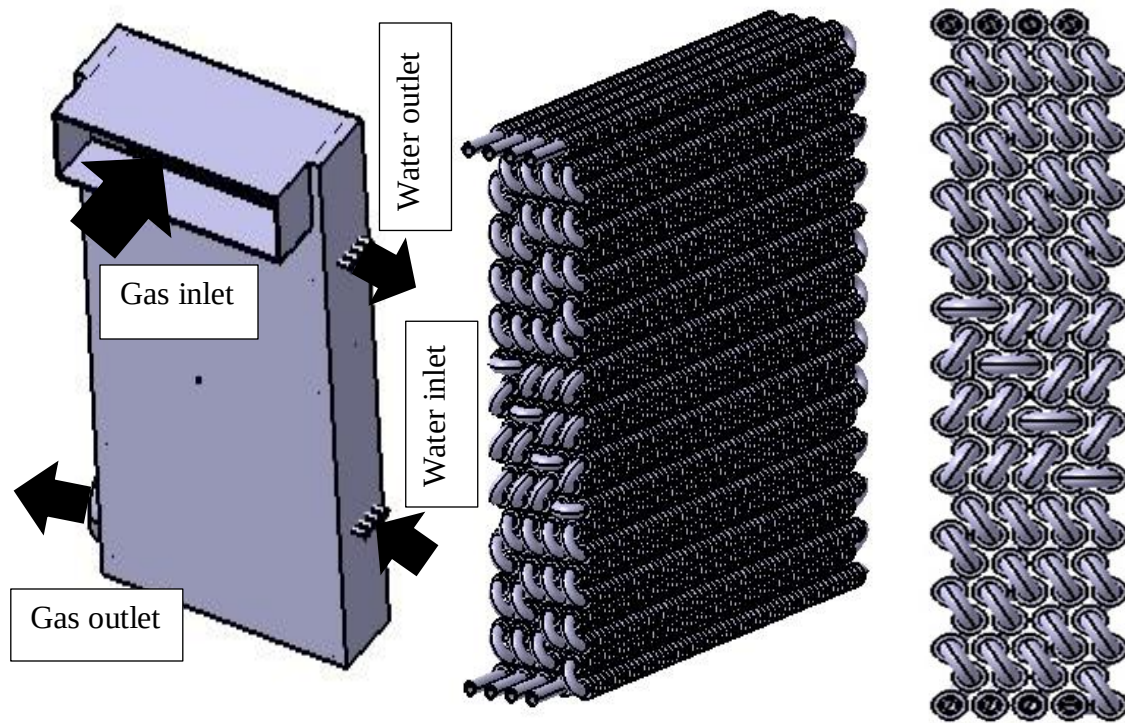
Figure B. Rough sketch modified shell and tube heat exchanger (CATIA V5 R19)
